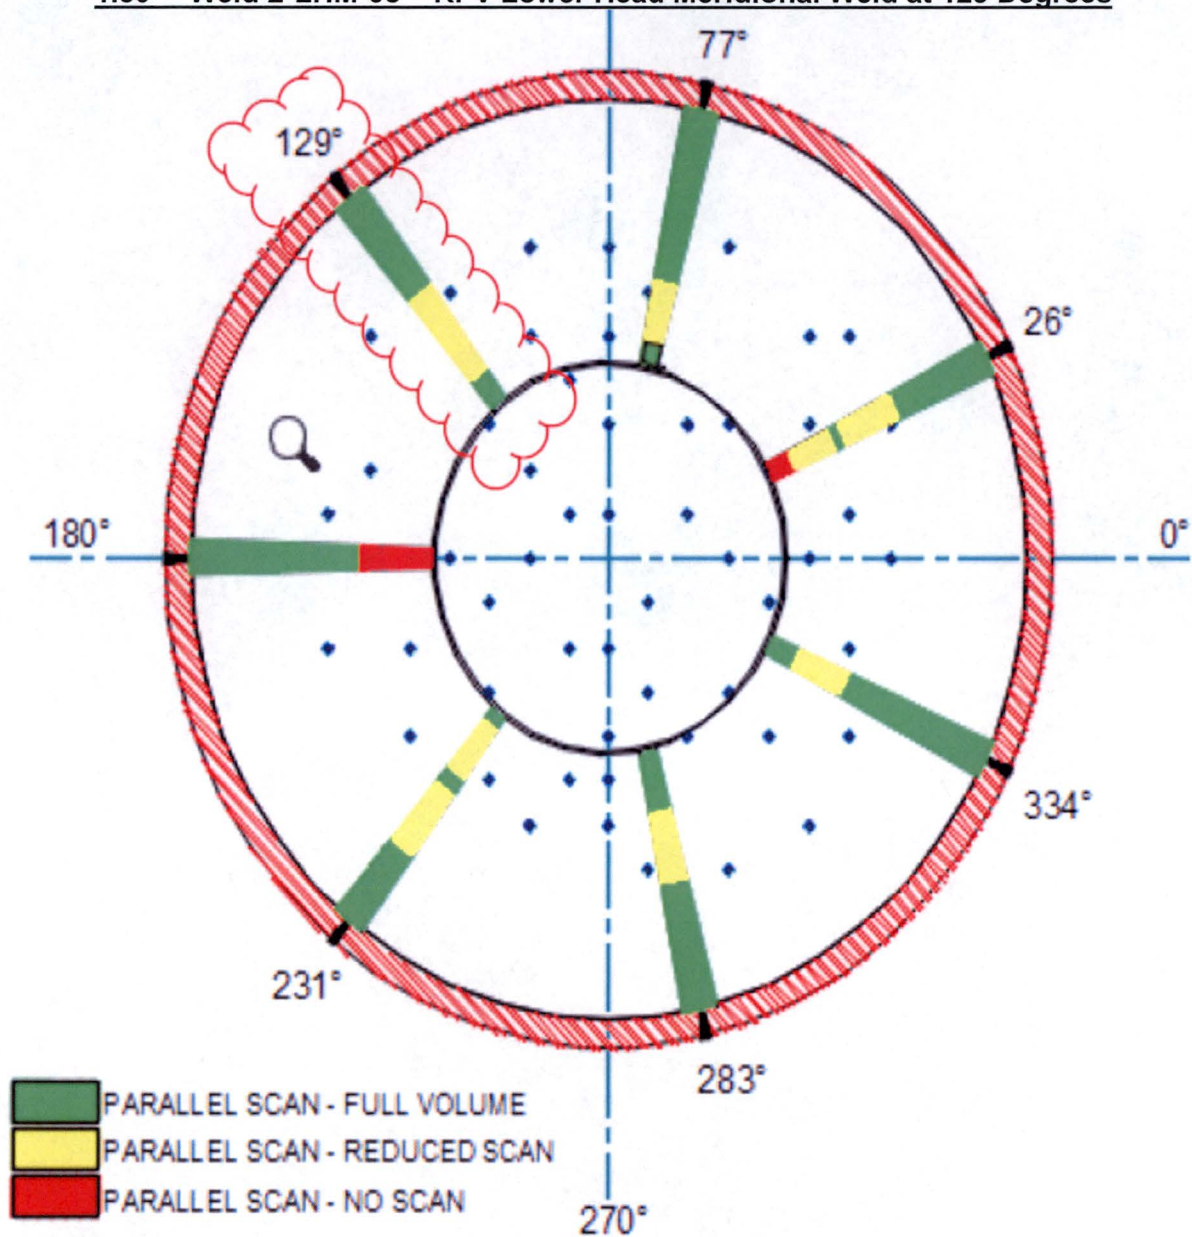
Weld 2-LHM-03 (Extracted from Reference DRAWING 2A-1)
